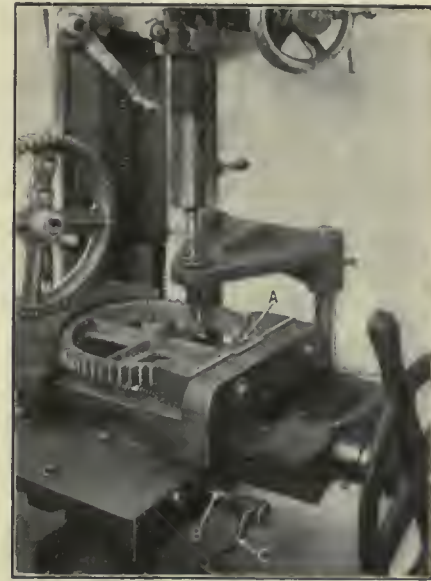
GEAR AND PULLEY DRILLING AND REAMING FIXTURE.
